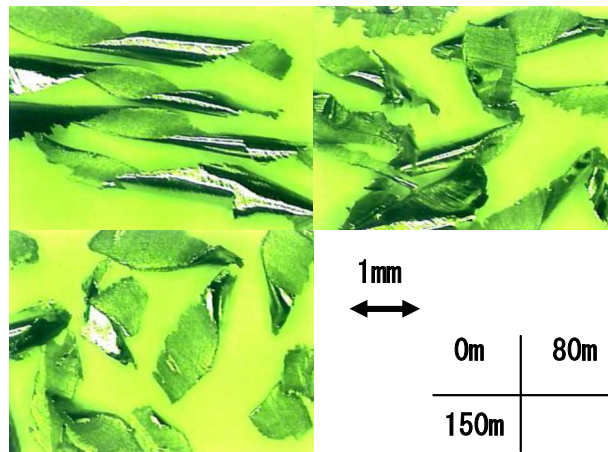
Photographs of chip (experiment② Endmill(A) Workpiece: Ti-6Al-4V)
